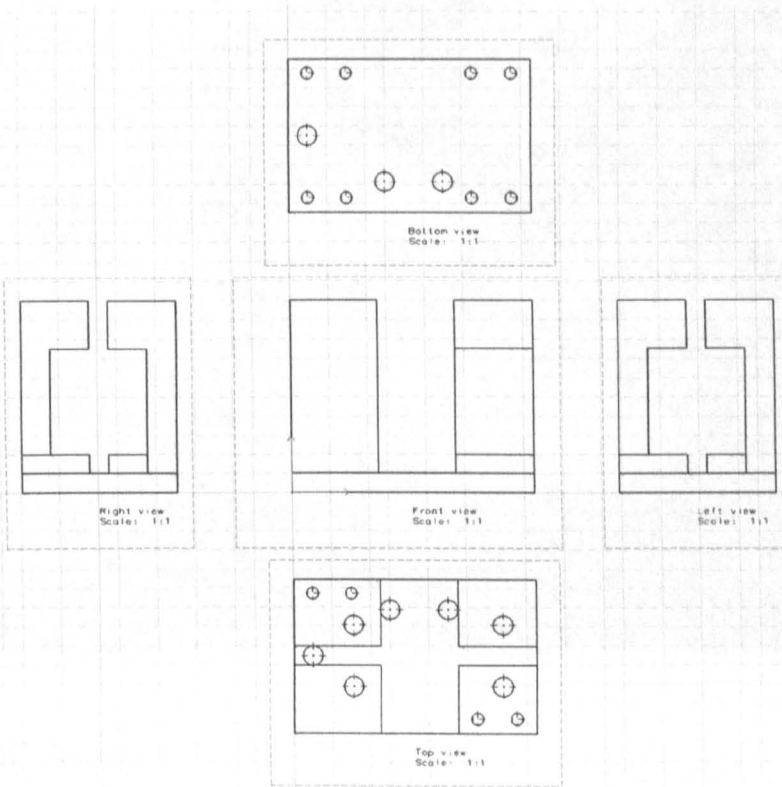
Mechanical drawing with side, top and bottom views of the ECT test fixture, produced in CATIA.
